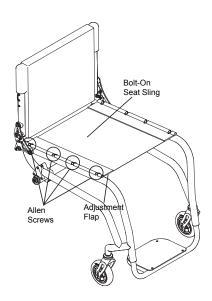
Adjusting Tension Adjustable Bolt-On Seat Sling
